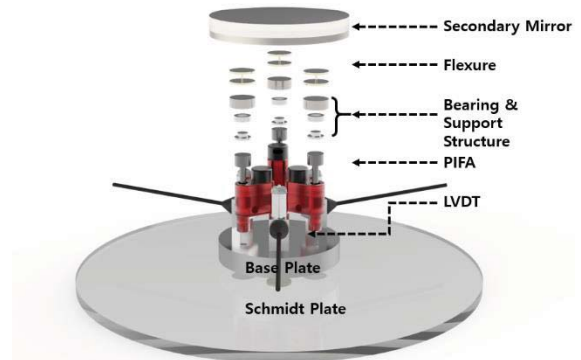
Focus Mechanism Assembly using PIFAs and LVDTs
